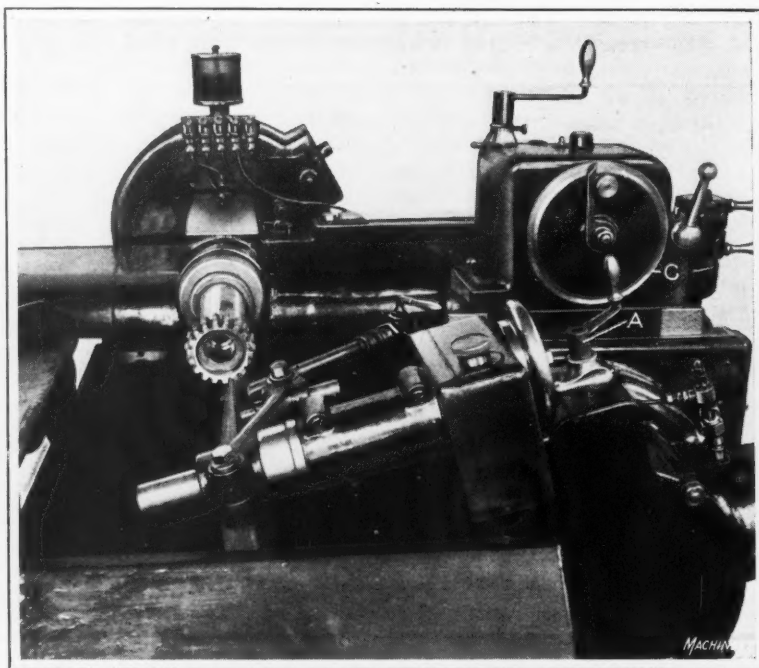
Grinding Teeth of Pinion on "Coast" Side, with Wheel inclined to the Left
